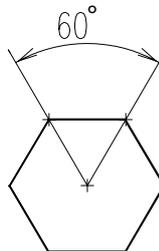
The size of the angle for a single surface on the hexagonal bolt head on the adjusting screws.
